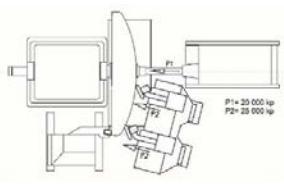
Pressing force of the workpiece P_1 , pulling force P_2
